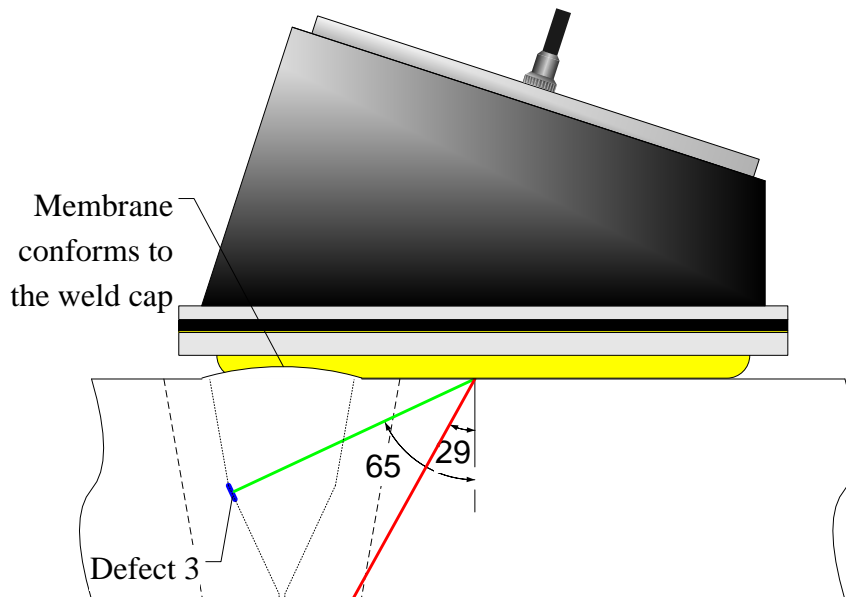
Schematic diagram to illustrate the through weld inspection of defect 3 using a direct 65° longitudinal wave inspection with the 18°, 20mm device.
